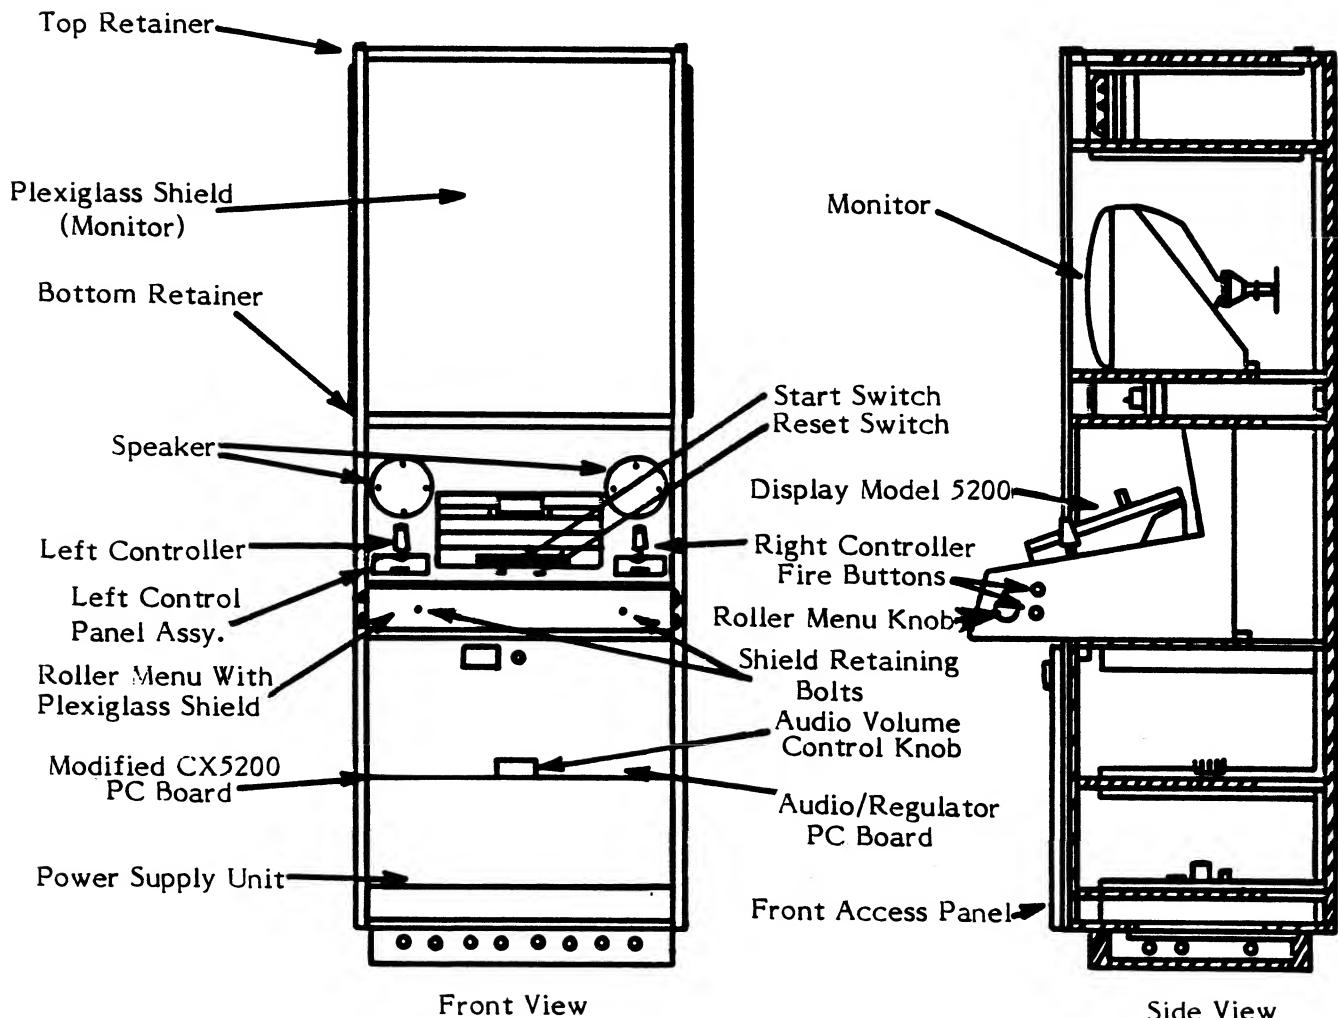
CX5200 Retail Demonstrator Assembly.
